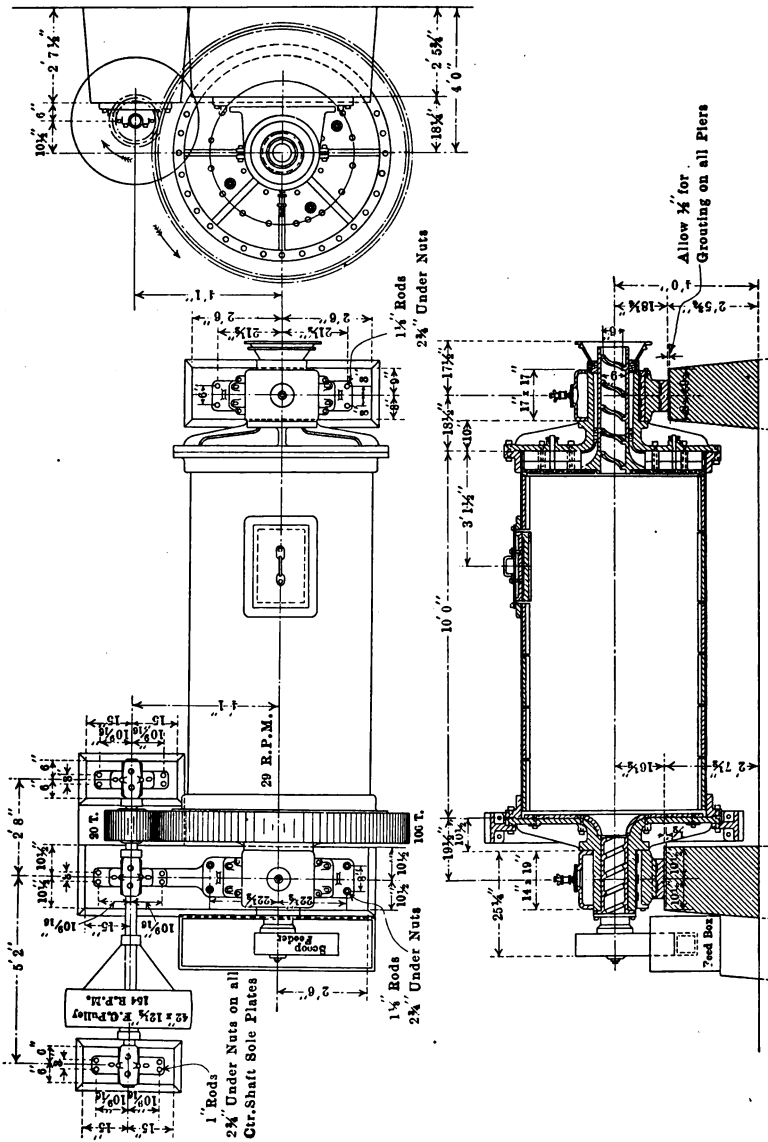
Details of a 5 by 10-ft. adjustable discharge tube mill.
